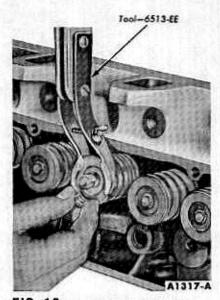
Valve Spring Retainer Locks Removal or Installation
